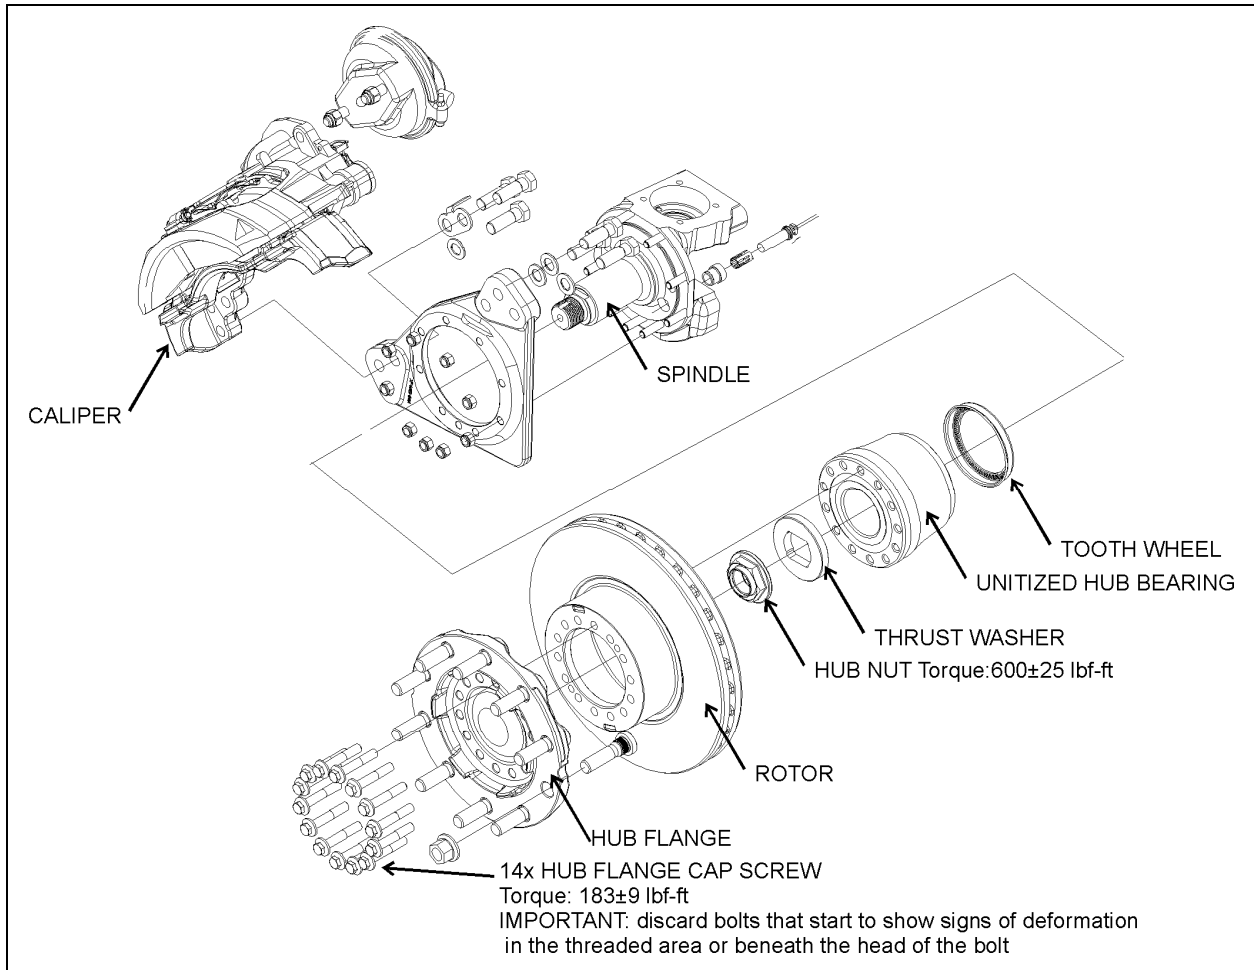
FRONT AXLE HUB AND ROTOR ASSEMBLY
